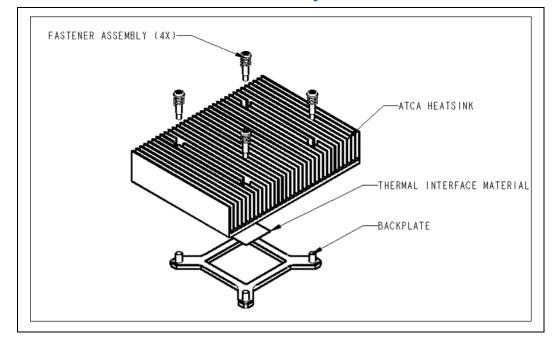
AdvancedTCA* Reference Heatsink Assembly
